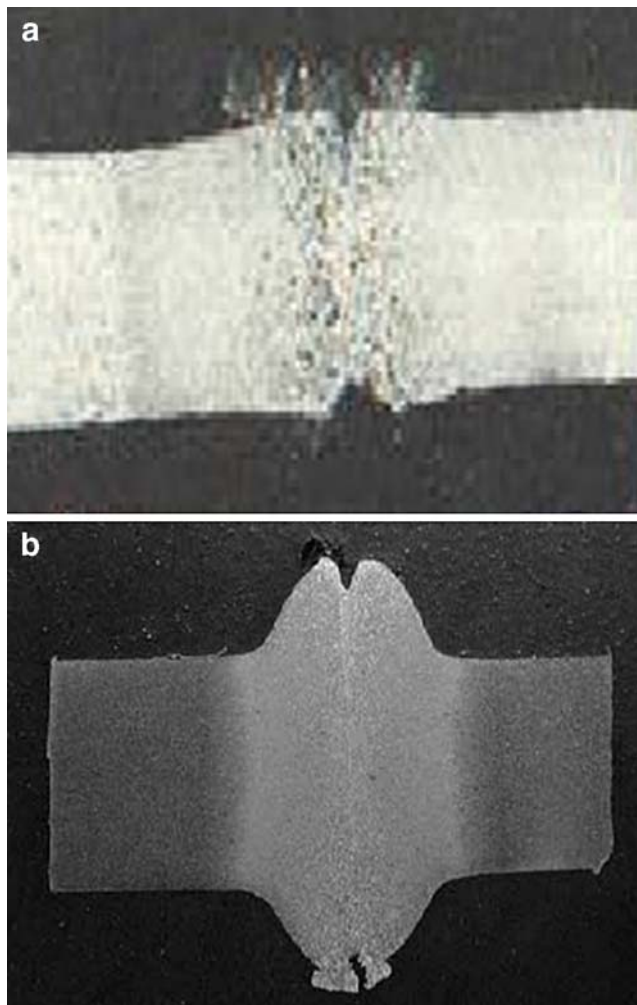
Macrograph of weld joint of MIAB process [5]
